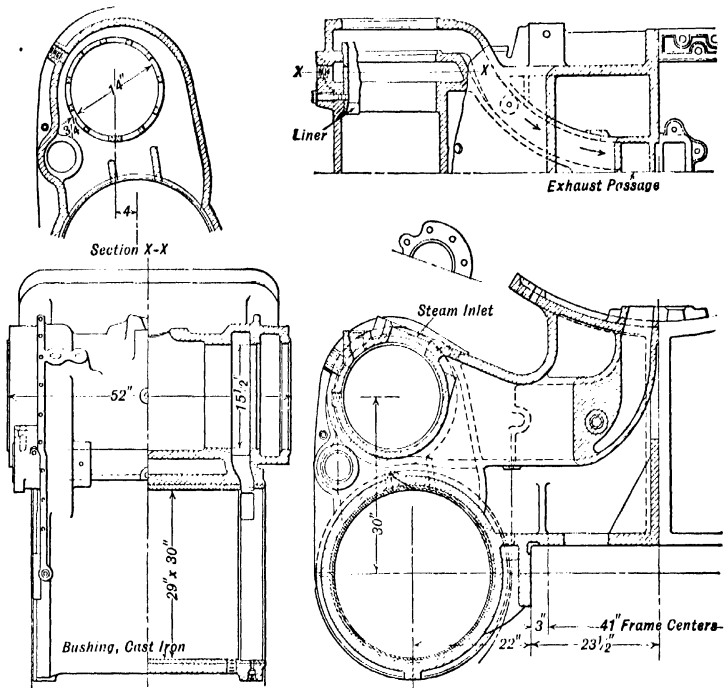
Portion of a 29 in. by 30 in. (4-8-2) Locomotive Cylinder Casting.
